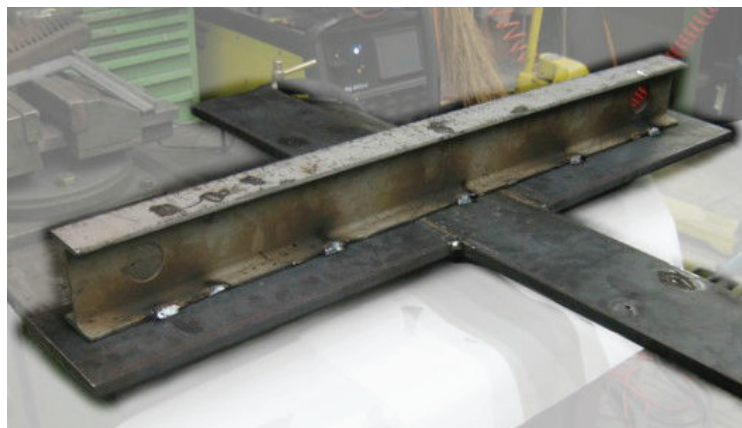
Rigidifying beam welded over the butt-welded plates Side B
